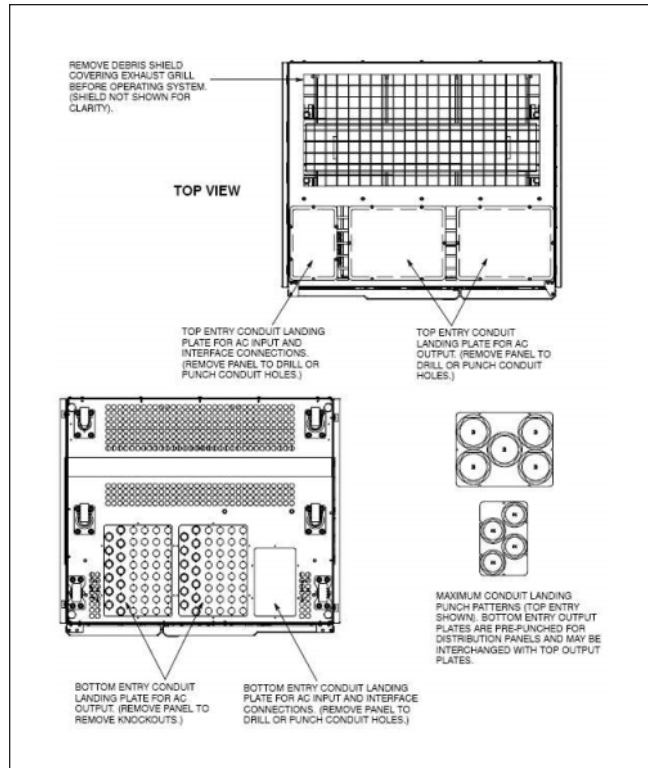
9390 (40-80 kVA) IDC Top and Bottom View
